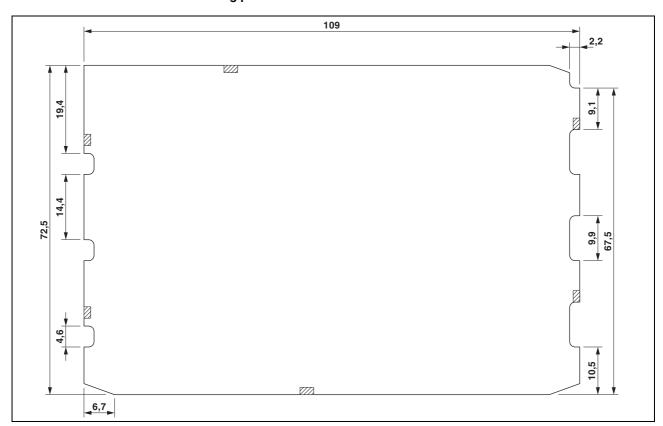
Maximum dimensions of the horizontal PCB of the 75.2 lower housing part
